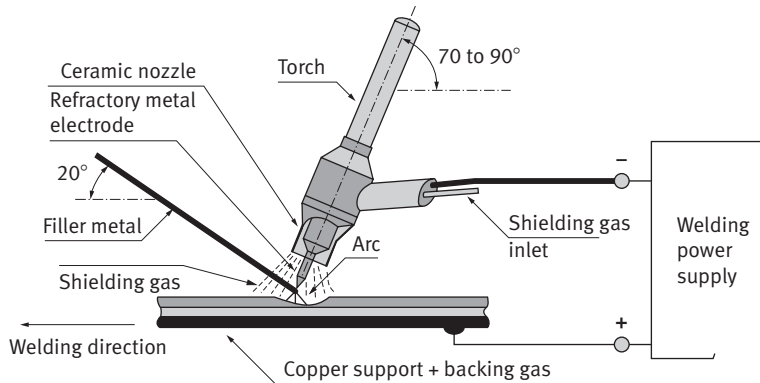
Example of manual welding using the GTAW (TIG) process
